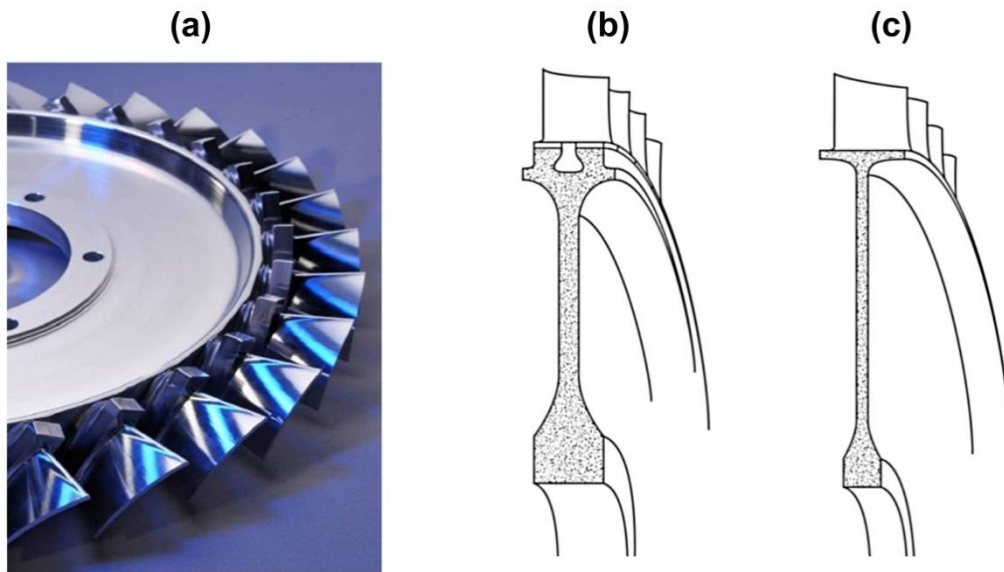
(a) an integrated bladed disk (blisk) manufactured at TWI (courtesy of TWI), (b) a conventional bladed disk assembly⁷ and (c) a linear friction welded blisk⁷.
